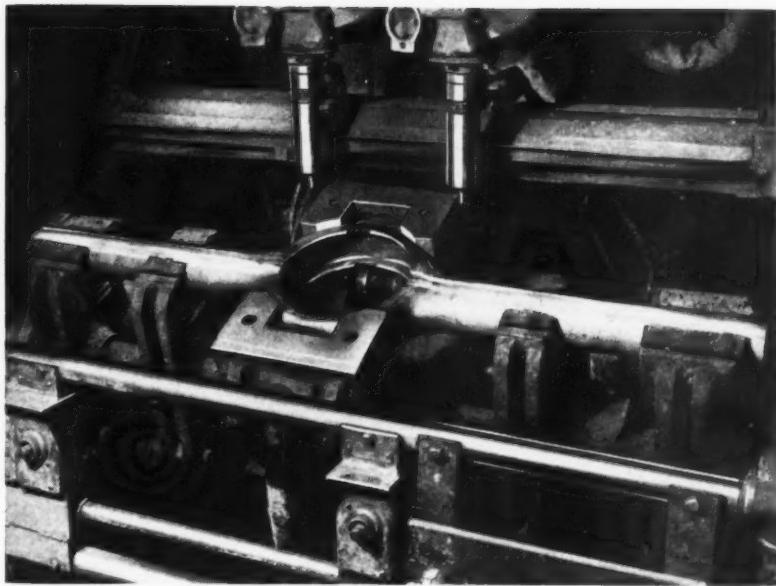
The Two Halves of a Housing in a Jig, Ready to be Welded
